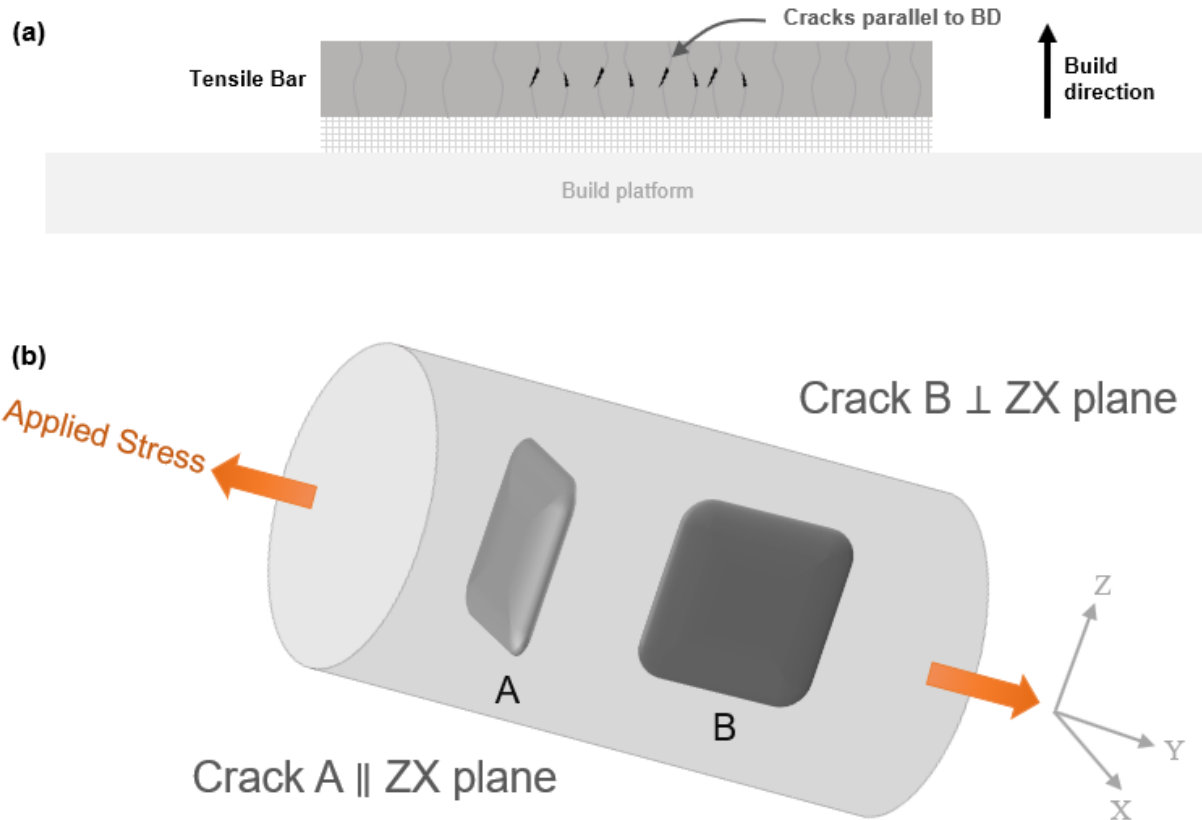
(a) Orientation of cracks in horizontally built tensile specimens used in fractography; (b) Range of orientations of cracks with respect to the applied stress and fracture surface.
